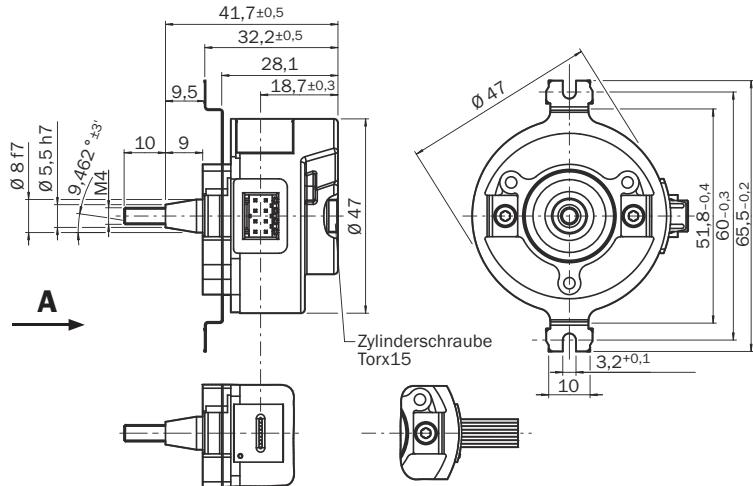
Dimensional drawing of SRS50S/SRM50S, conical shaft, spring plate
